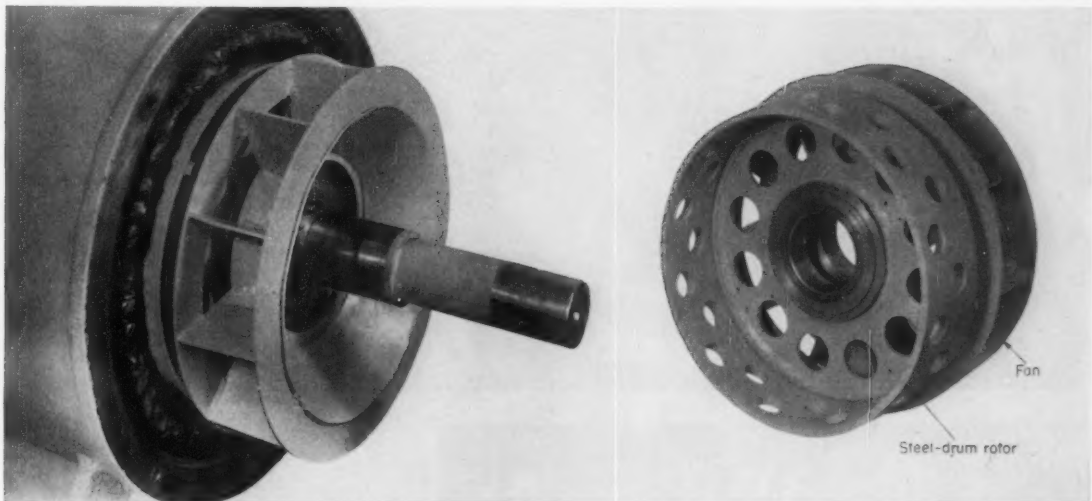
Fan runs while motor stands still in this wound-rotor motor designed for adjustable-speed and hoist applications. Besides the main wound rotor, a second steel-drum rotor with an integral fan is driven by the rotating magnetic
